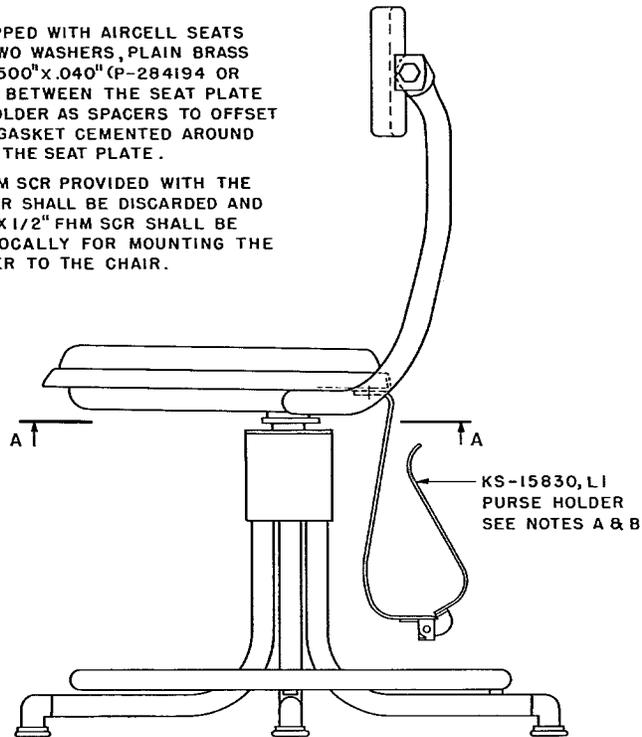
Method of Mounting KS-15830, L1 Purse Holder to KS-15531 or No. 5AR Offset Operator Chairs — (KS-15531, L9 Chair Illustrated)
